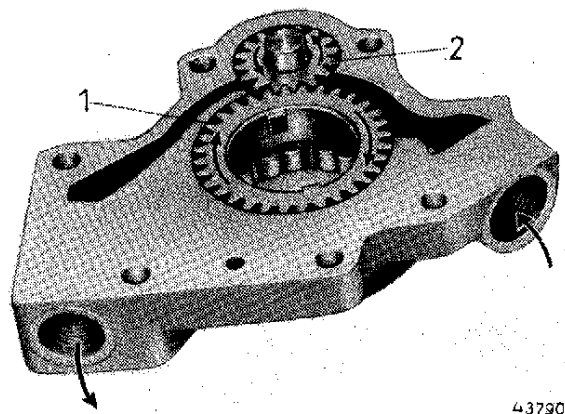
Transmission Oil Pump, Pump Housing and Gears
